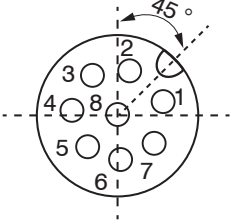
Dimensional drawing, dimensions in mm (inches), not to scale
